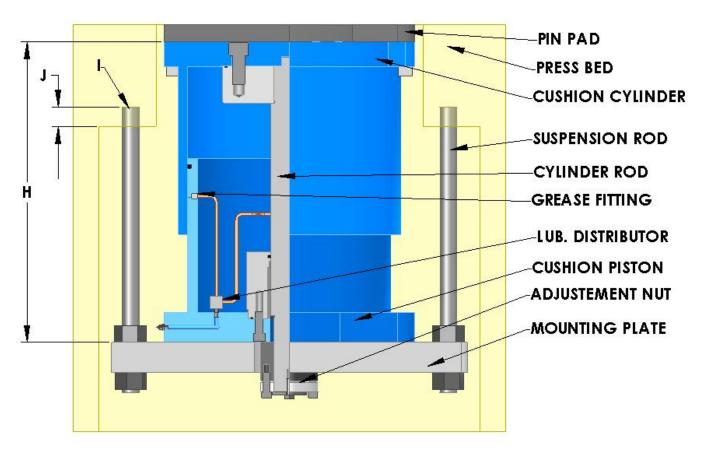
Press bed mounted cushion. Dimensions A and B to be specified by the customer.
